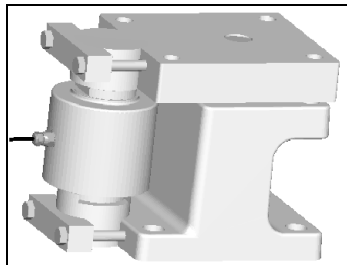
FINISHED LOAD POINT ASSEMBLY WITH STANDARD LOAD SENSOR
